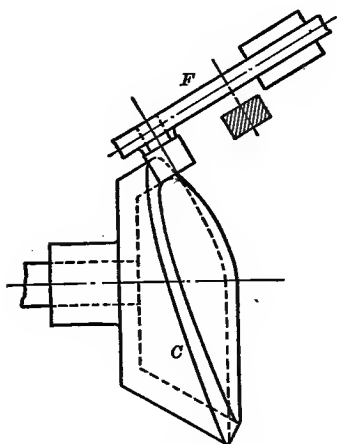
CONICAL CAM AND RECIPROCATING FOLLOWER
